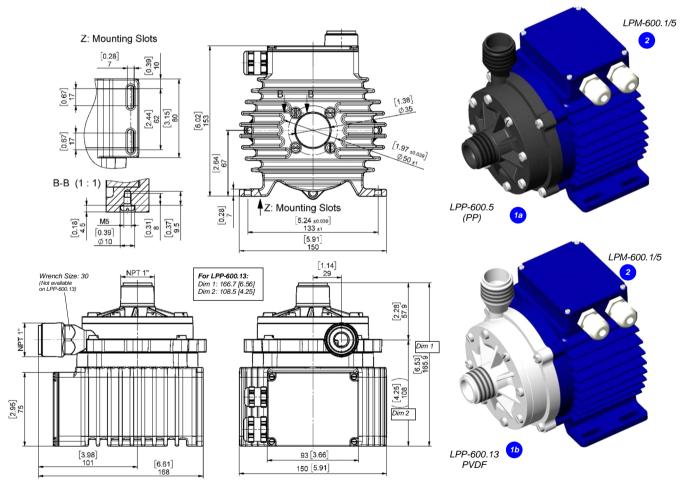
Dimensions of motor with pump heads LPP-600.5 (PP Housing) and LPP-600.13 (PVDF Housing)
